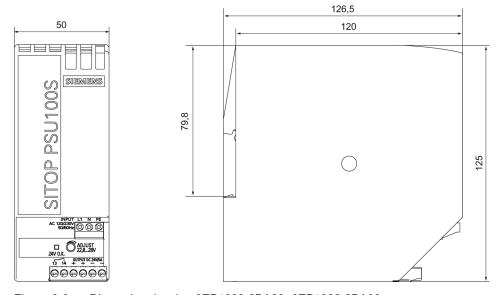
Dimension drawing 6EP1333-2BA20, 6EP1322-2BA00
